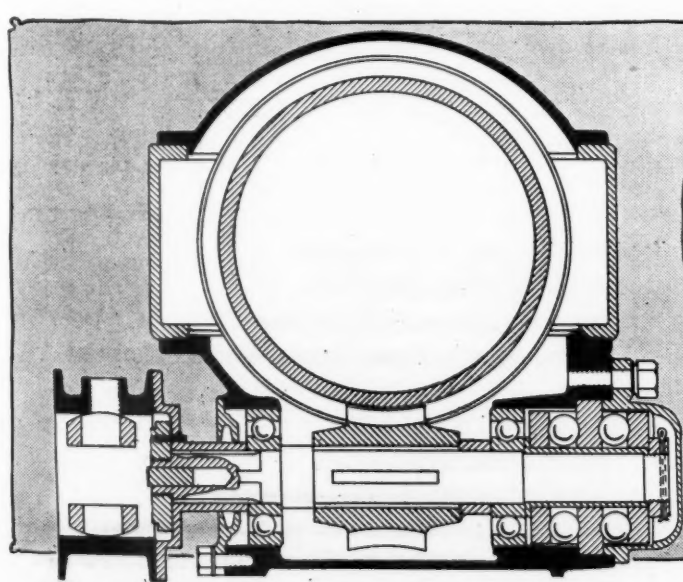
Longitudinal section through Thornycroft rear axle adapted for worm drive
